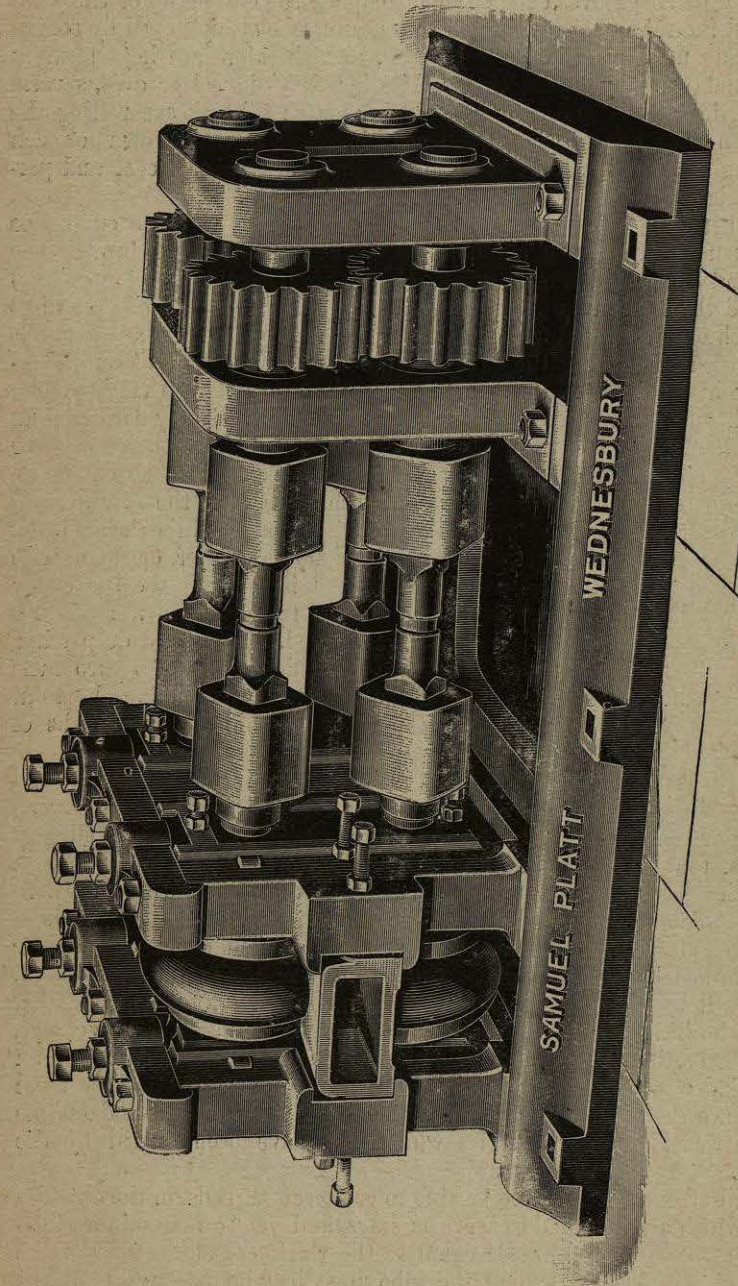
Mill for Rolling Close-jointed Tubes.
